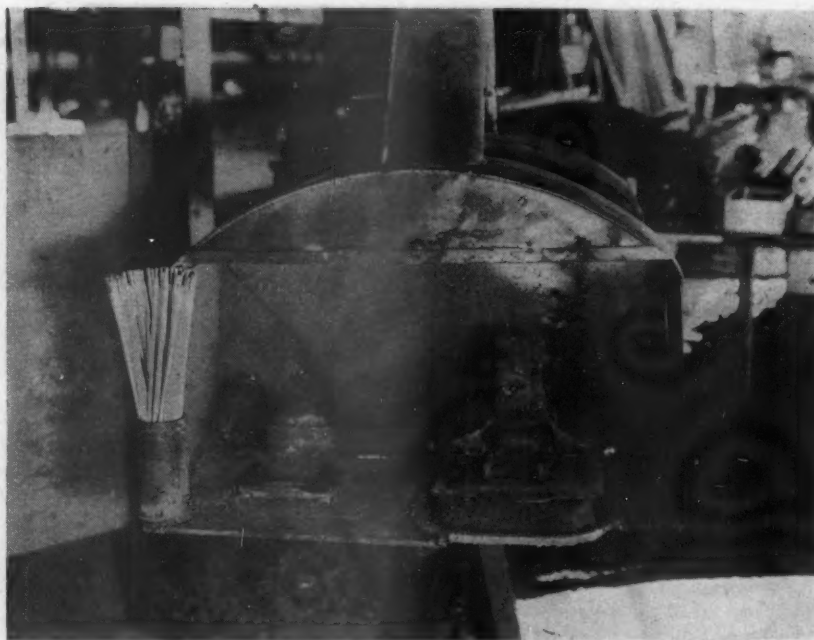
A Journal Box Lid in Position for Welding
